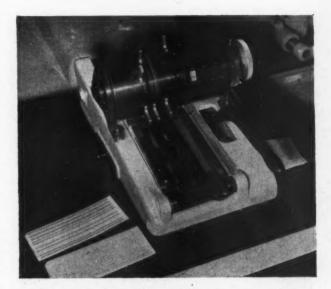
Close-up view of the card punching unit, also seen at the extreme right in Fig. 1, for preparing the cards to be used on the boring machine. A card, held in a carriage, is indexed by means of a key, and punched by depressing the lever
